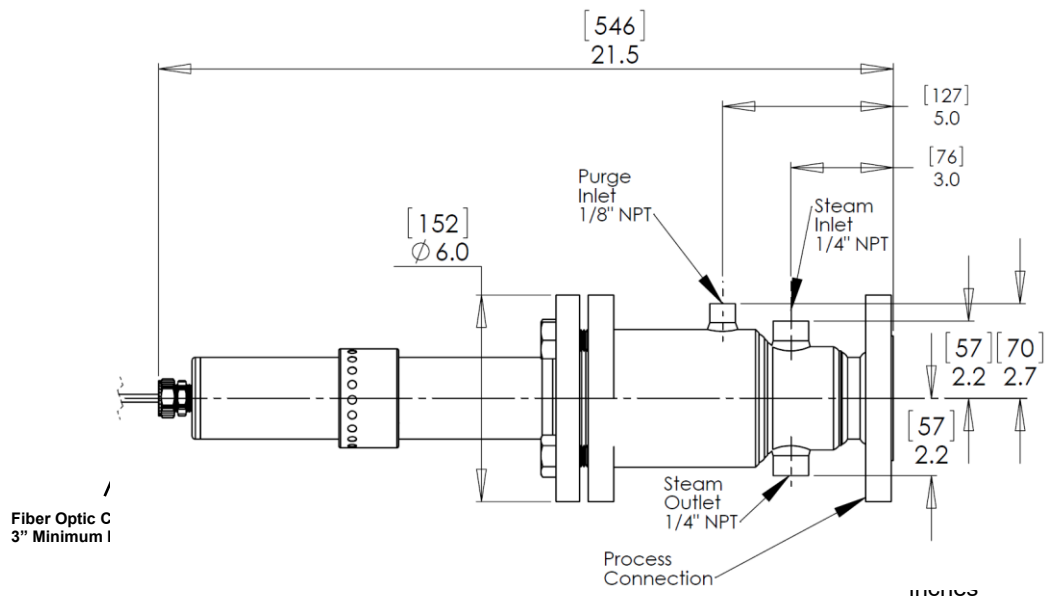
Dimensions – Steam Jacketed Lens Assembly
